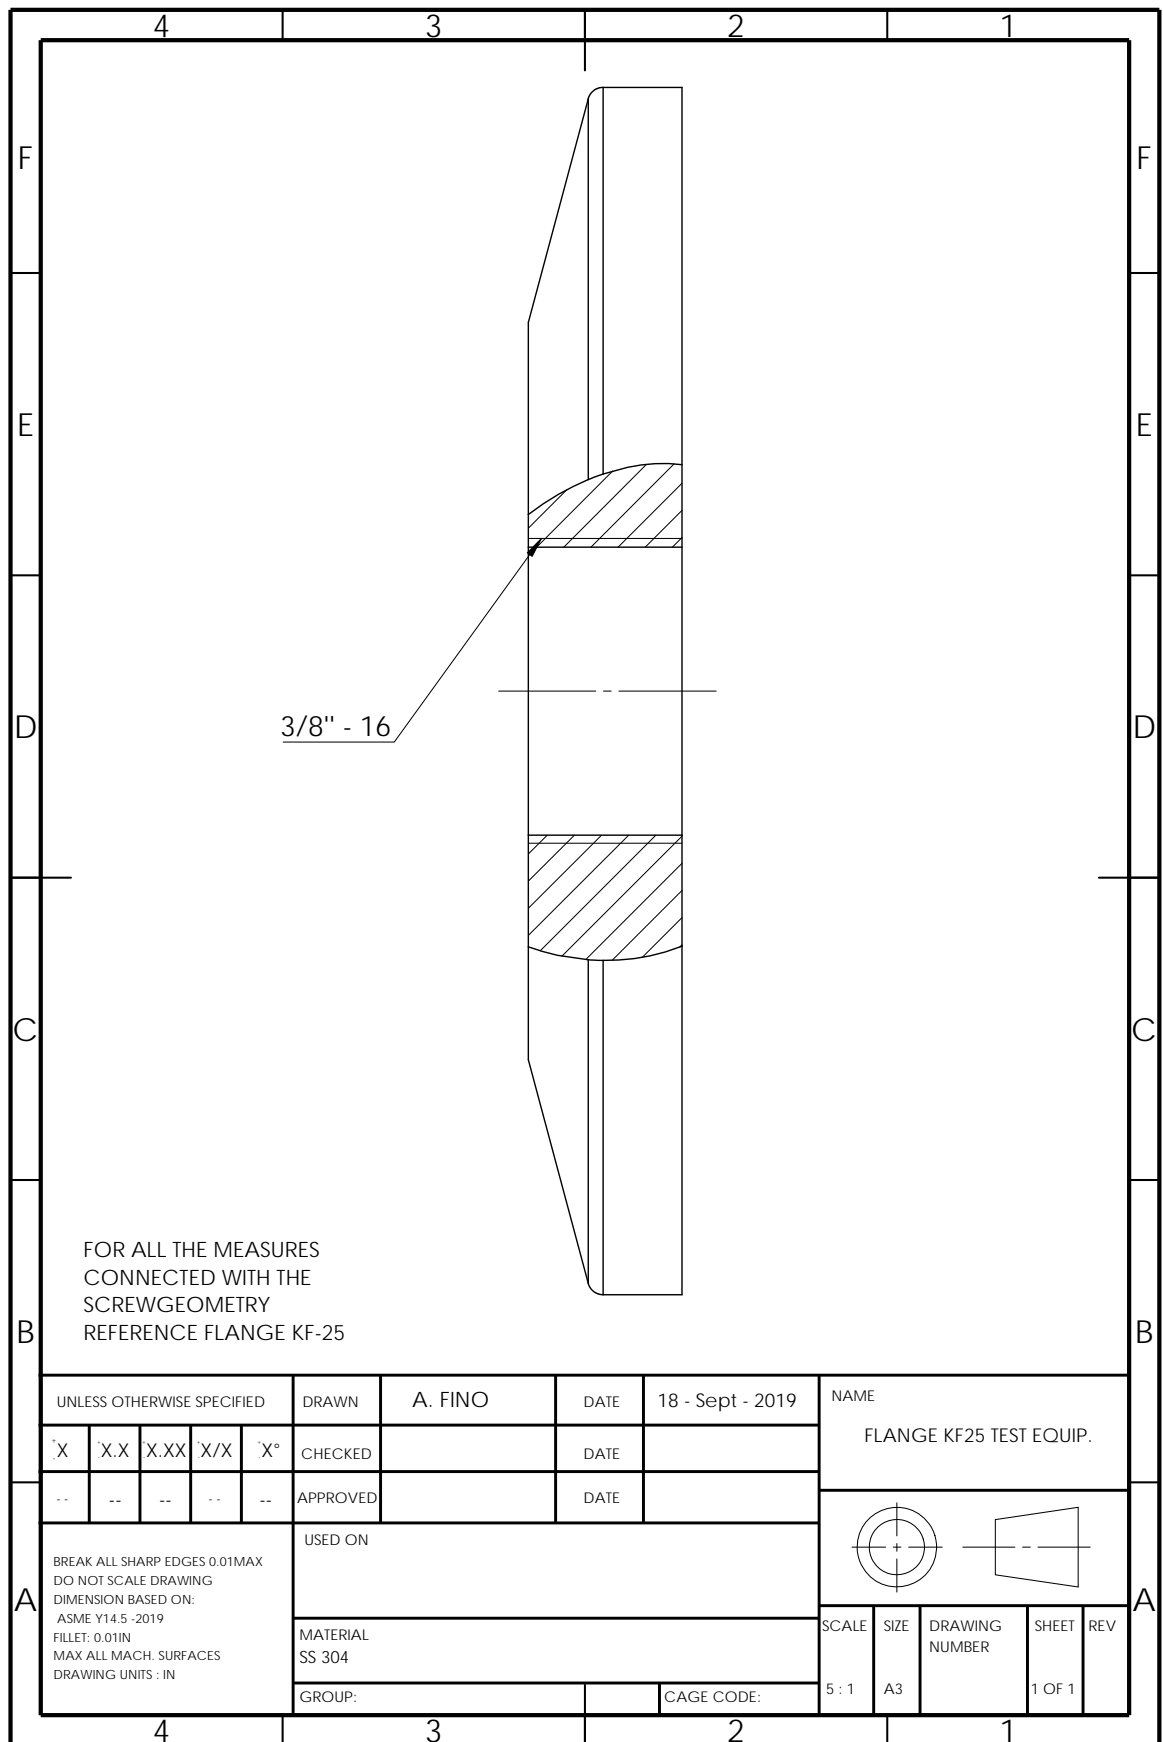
KF Flange Modified, Mechanical Drawing.
